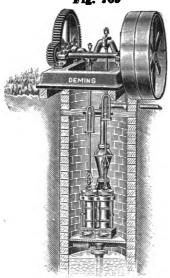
illustrates our Geared Power Working Head with Fig. 348 Double
